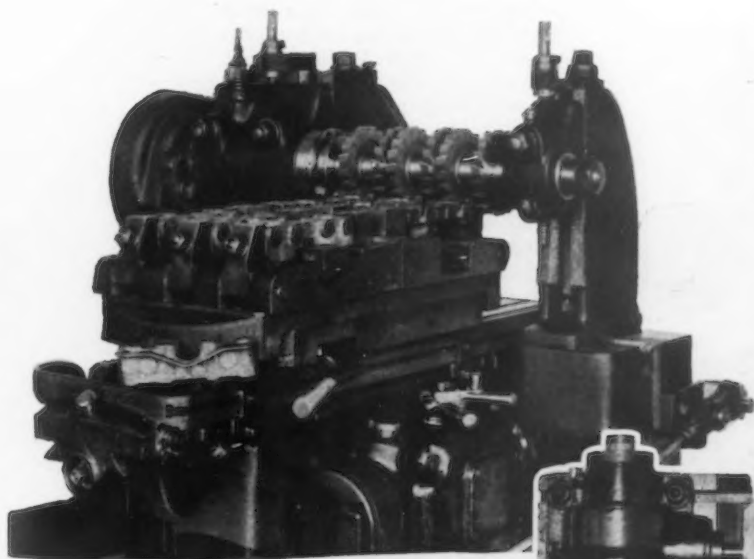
The Automatic Machine Is Coming Into Wider Use—a Standard Machine With Special Work-Holding Fixtures
